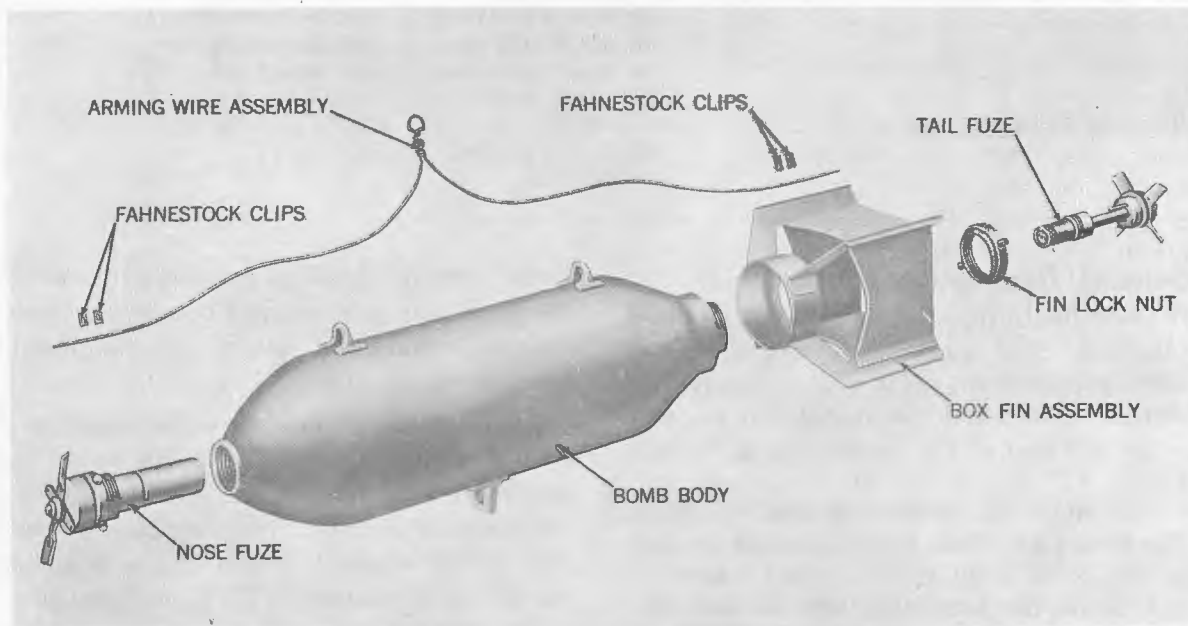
100-lb GP Bomb AN-M30A1 with Fin Assembly AN-M103A1, Exploded View.
